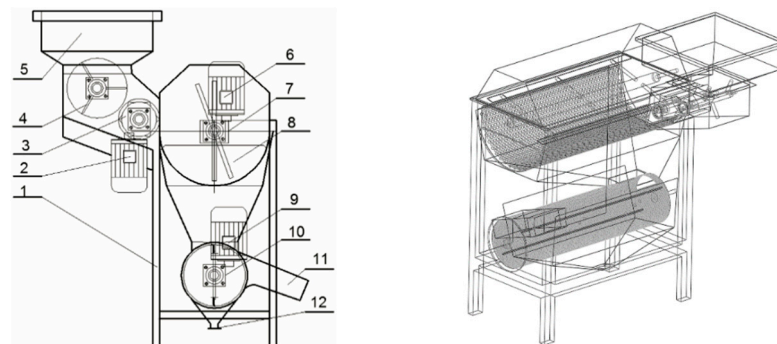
The whole machine structure and three-dimensional model of seed melon crushing and seed-extraction separator. (1) Frame; (2) motor I; (3) extrusion roller; (4) seed melon crushing toothed roller; (5) feeding hopper; (6) motor II; (7) melon skin–flesh separation device; (8) melon skin outlet; (9) motor III; (10) seed–flesh separation device; (11) melon seed outlet; and (12) melon juice outlet.
